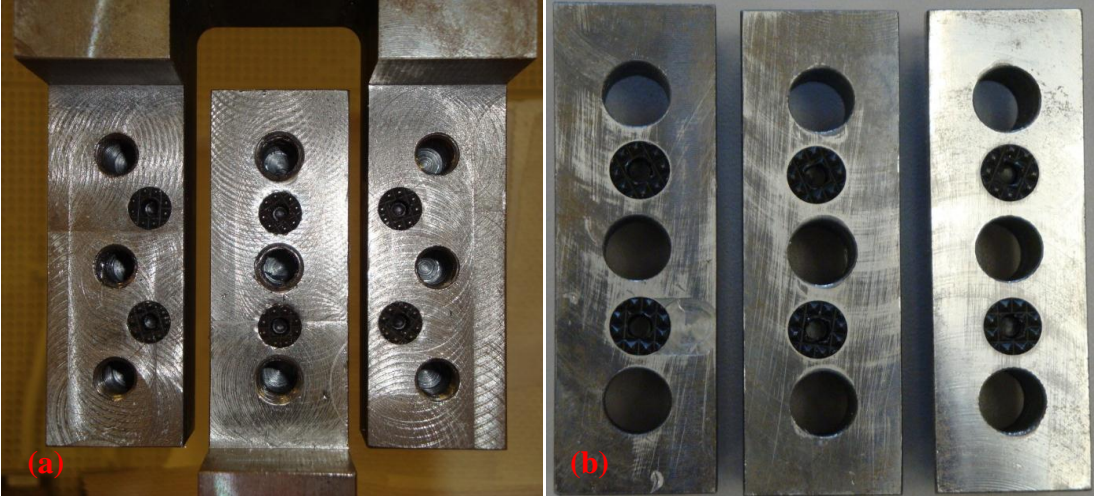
Photograph of inserted knurled blocks on the surfaces of (a) the upper and lower fixtures, and (b) the holding blocks of the cyclic shear test fixture
